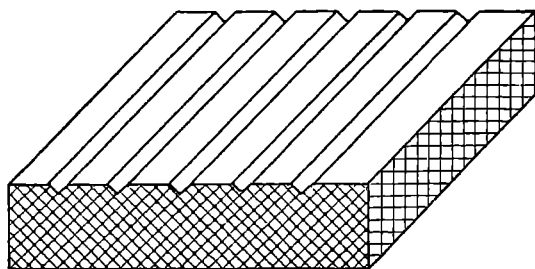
Brick with grooves for heating of cylinder-shaped parts in horizontal position
